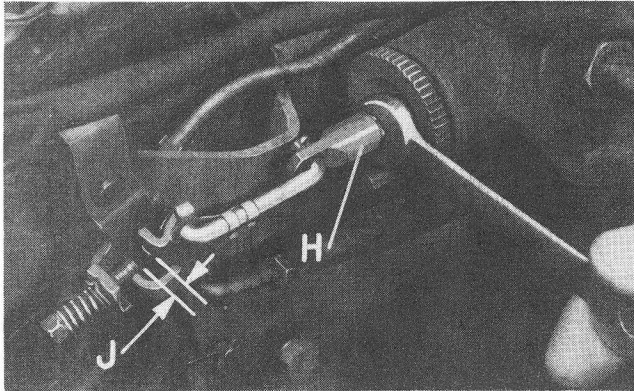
Adjust Spool Rod until Power Cylinder Starts To Move as Clearance (J) Is Taken Up
